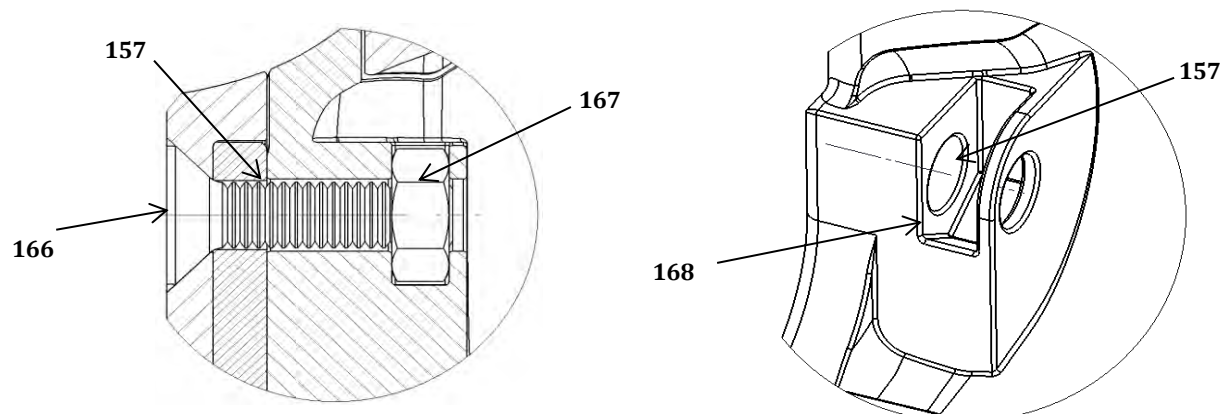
Lateral section and antero-lateral perspective view of the posterior palmar cover and wrist stem fixture.
